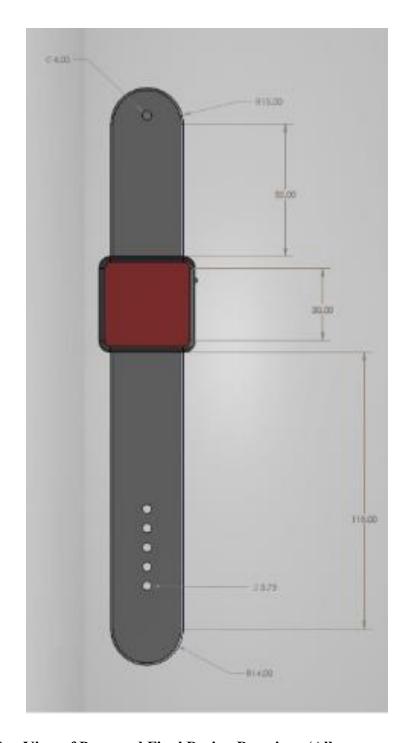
Top View of Proposed Final Design Drawings (All measurements in mm)
